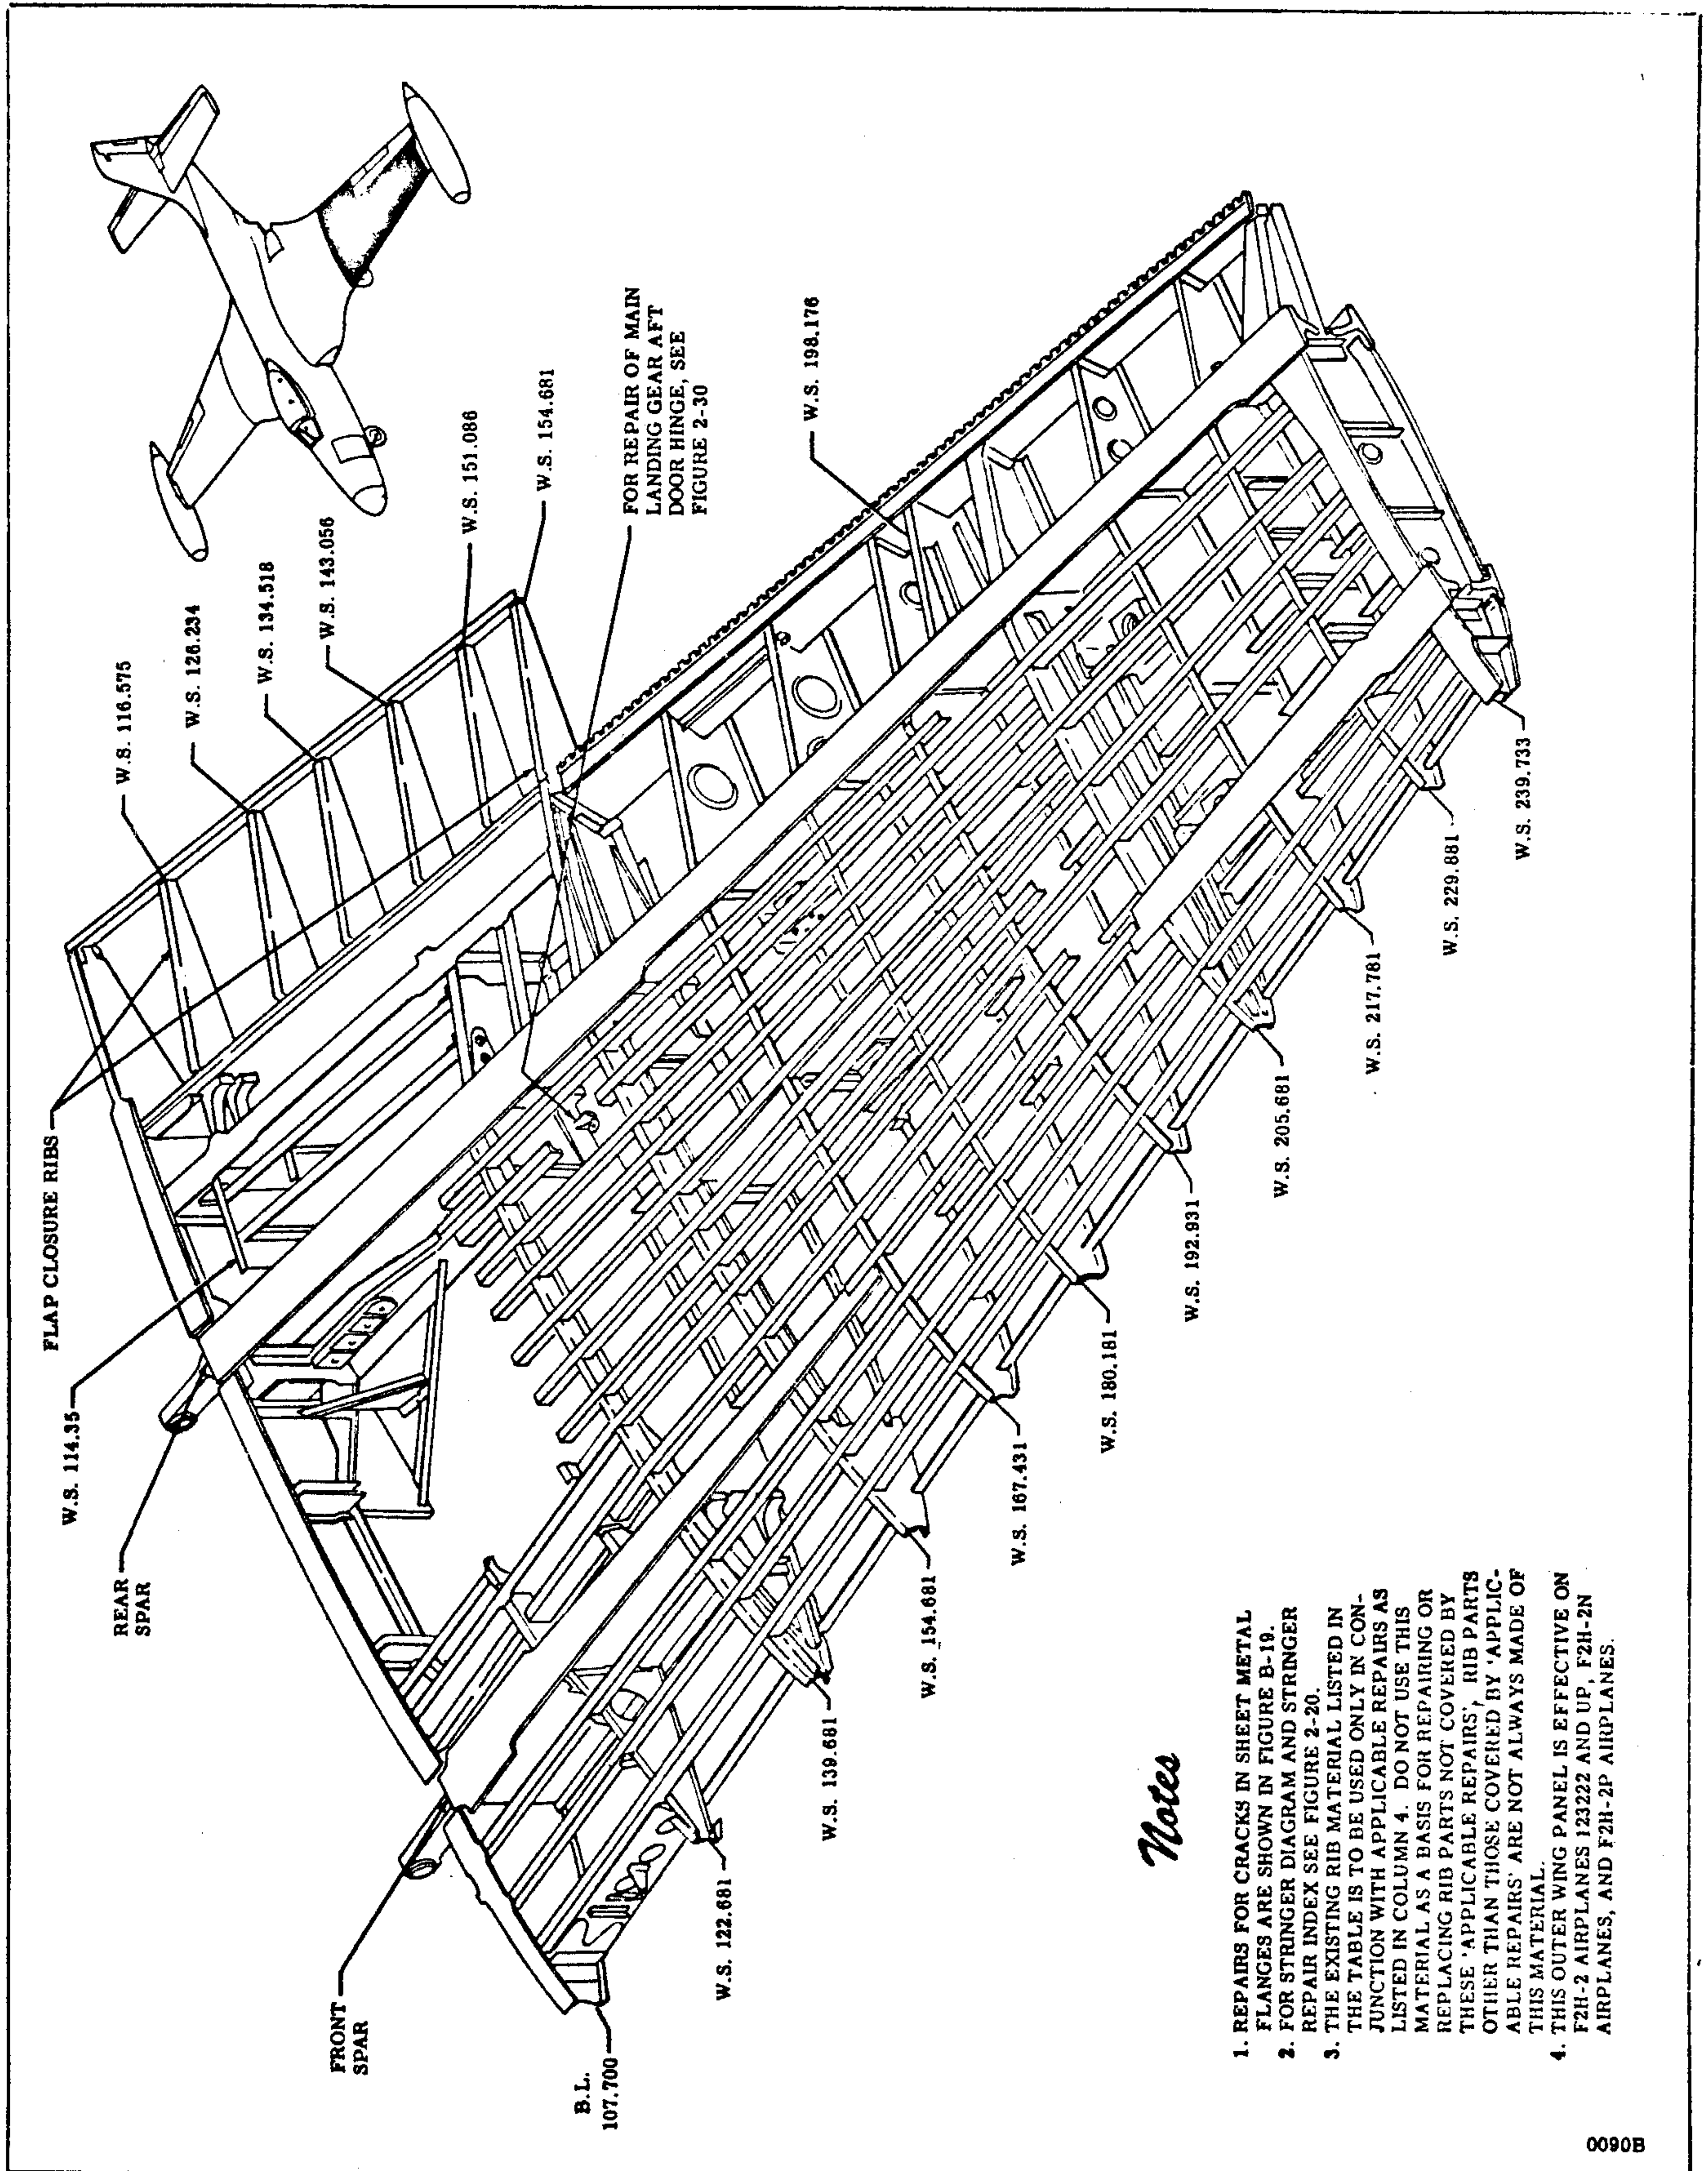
Wing Outer Panel Structure. F2H-2, F2H-2N and F2H-2P Airplanes (Sheet 1 of 2 Sheets)
